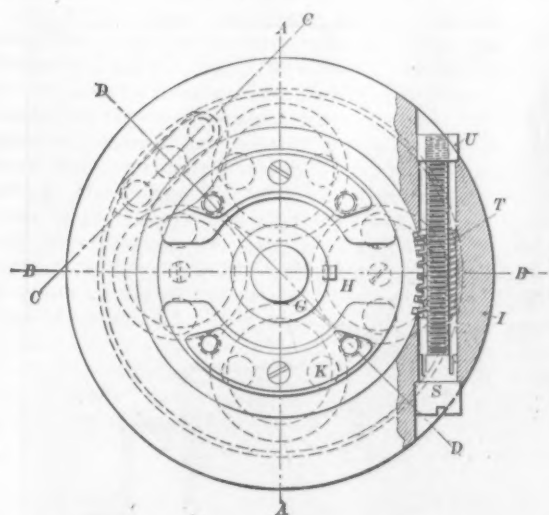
Rear of Head with Flange Removed, Showing Section through Adjusting Rack for Adjusting Die to Size.
